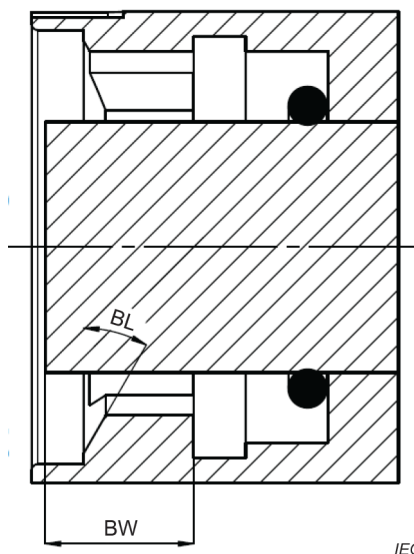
Side view of the female side of the push-pull housing for B-coding
